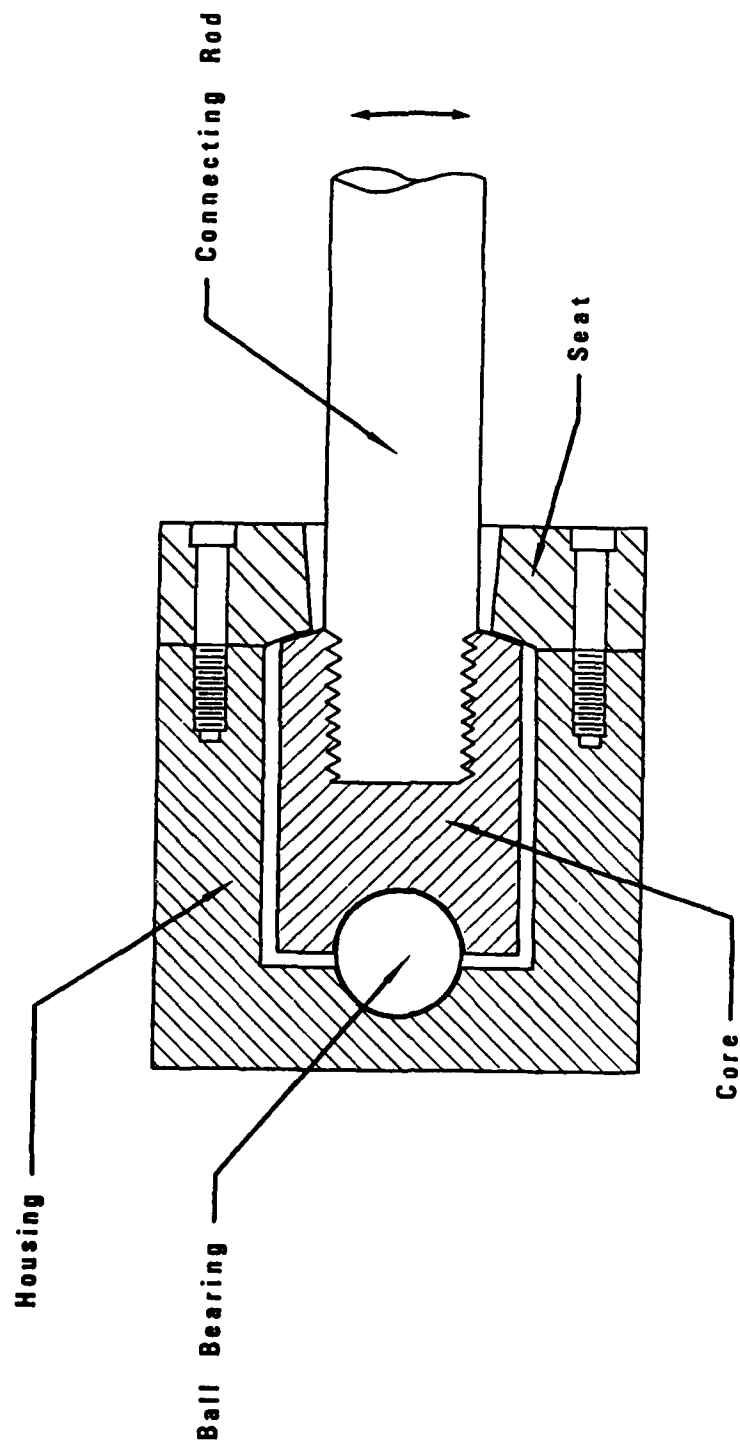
Cross-Section Through Assembled Spherical Seat
